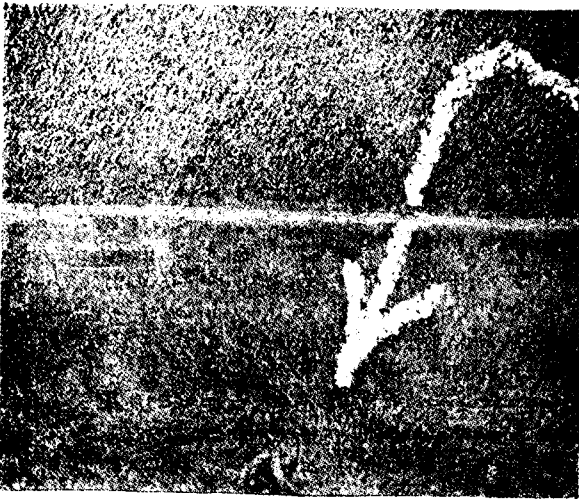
Fractured surface of backup roll sleeve split in service. The failure originated at large non-metallic inclusions located under the rolling surface.
